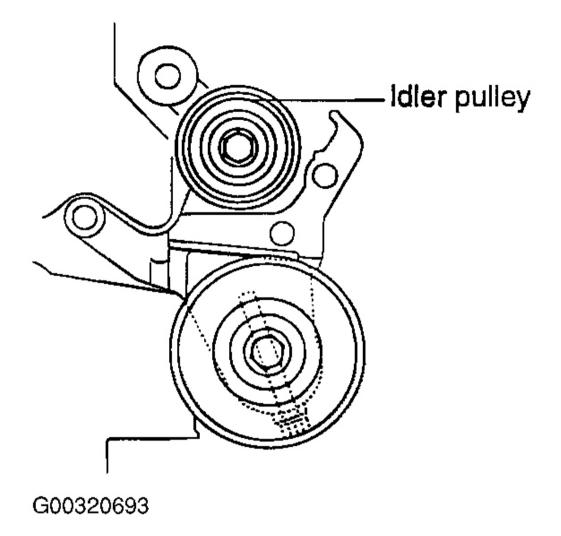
Installing The Idler Pulley To The Engine Support Lower Bracket Courtesy of KIA MOTORS AMERICA, INC.
